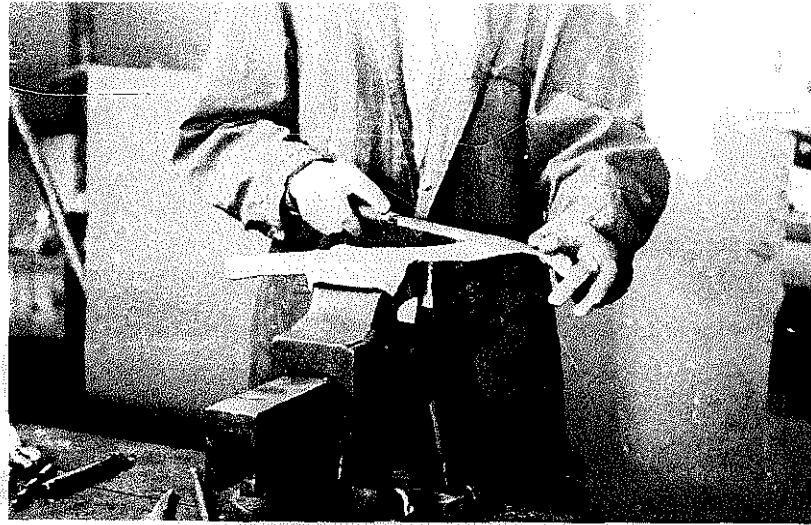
Fitting a hammer handle with a wood rasp.
